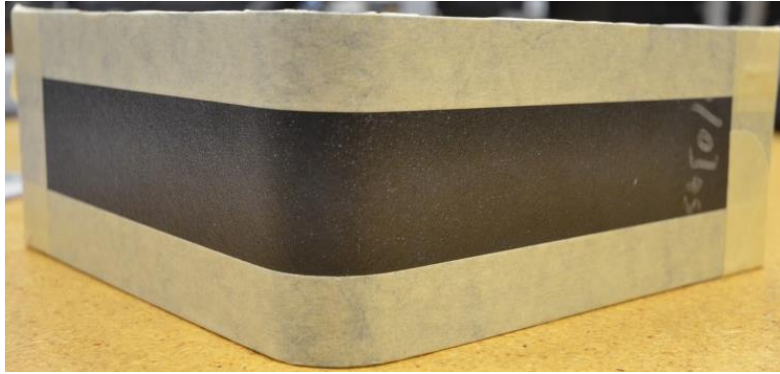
Masking tape covering the edges of the L-shape specimen before trimming
